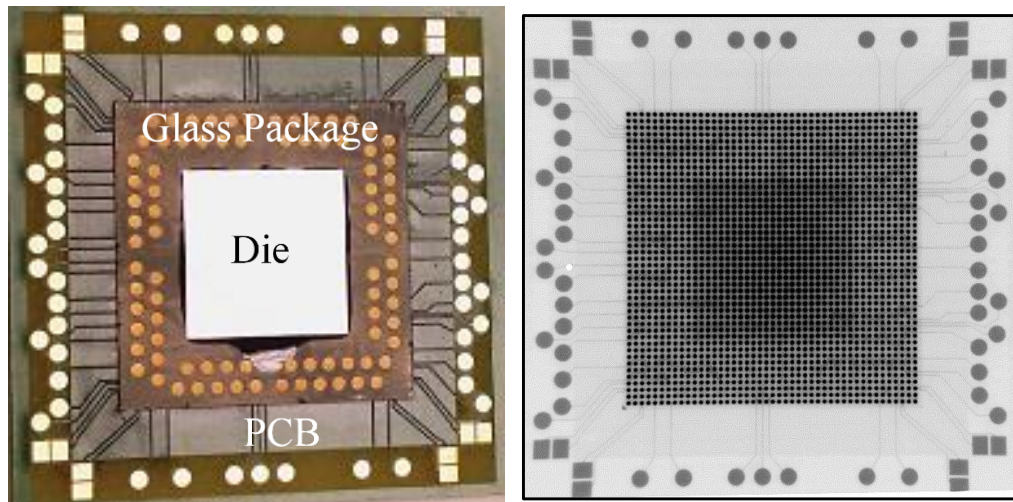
Single-chip glass package mounted on PCB: (left) optical imaging, and (right) X-ray imaging.
